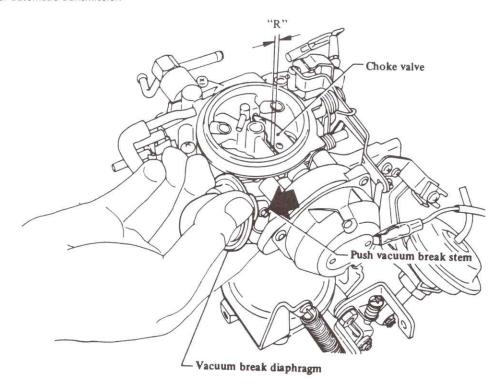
Checking vacuum break adjustment (Sec 11)
